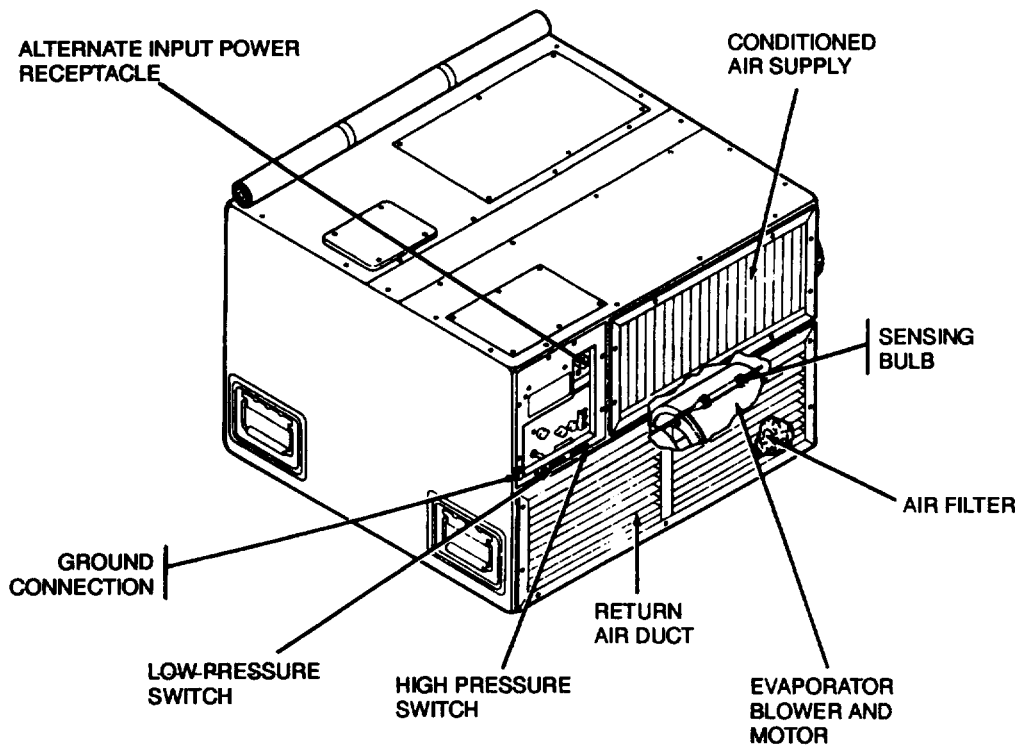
Air Conditioner, Evaporator Section (Sheet 2 of 2)
